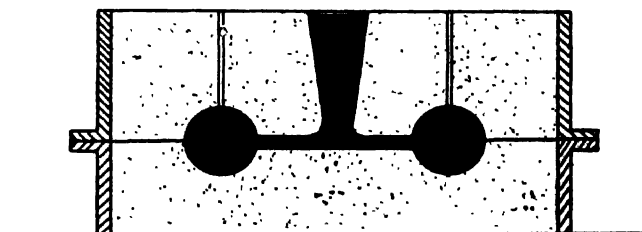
Casting gated at a thin section to provide uniformity of cooling.
